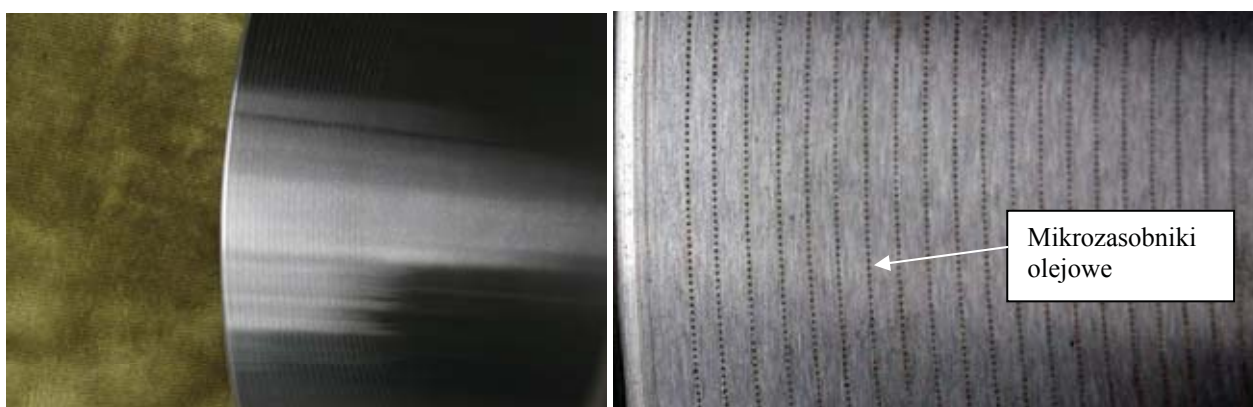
General view of stand to laser drilling of micro-containers- (a), as well as laser machining of cylinder liner (b)
